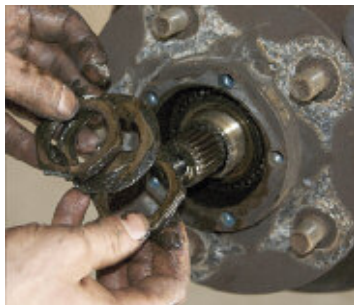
The removed lock nut, lock washer and hub adjusting nut.
